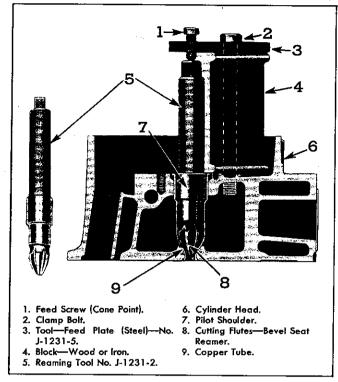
Reaming Bevel Seat in Injector Copper Tube for Injector Nut with Tool J-1231-5.
